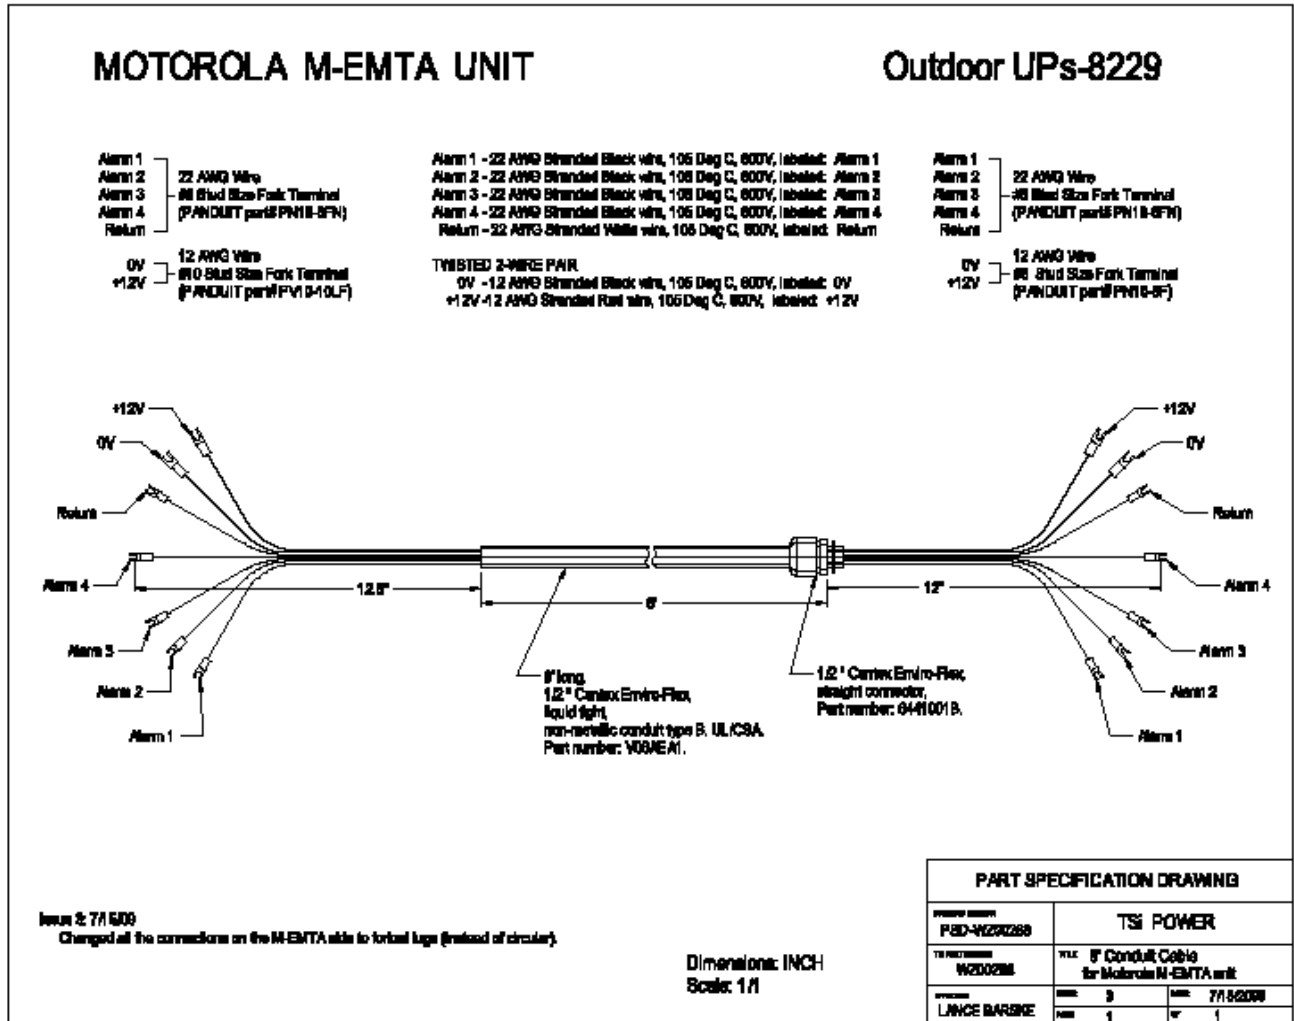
PSD-WZ00288 Motorola Cable Assembly
